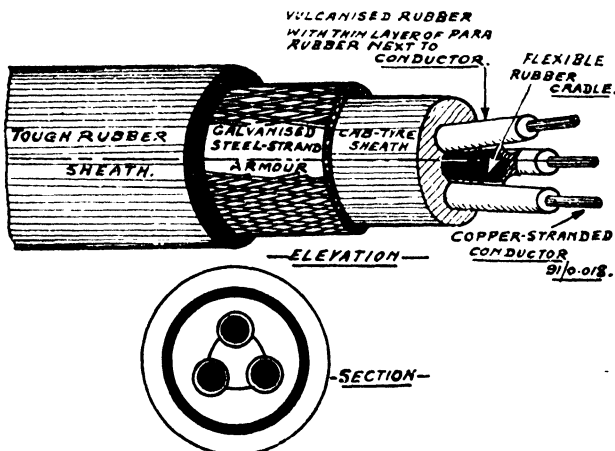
Pliable Armoured Cable for Conveyors and Loaders.
